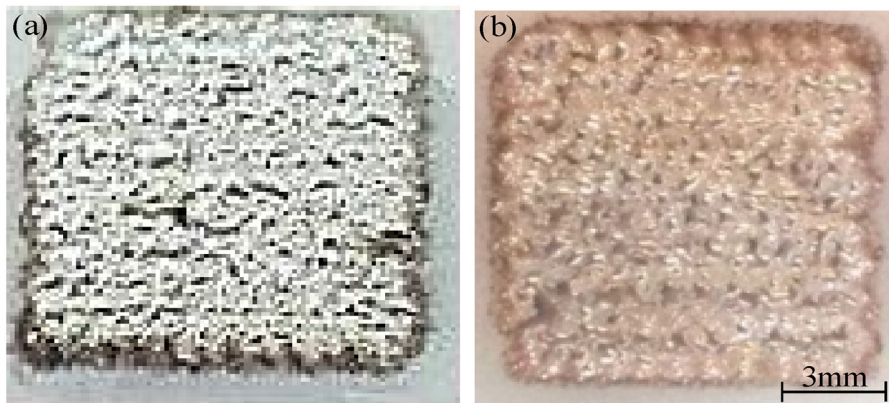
Macro-morphology of Cu cladding coated by (a) brazing and (b) laser [12].
